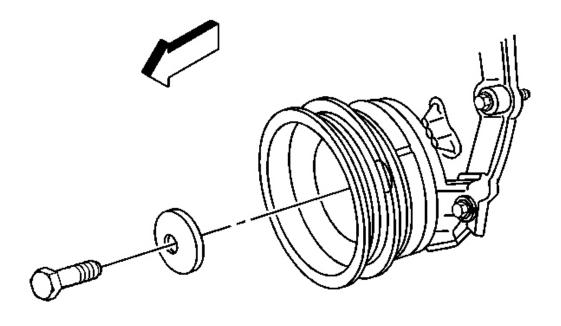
View Of Crankshaft Balancer Washer & Bolt Courtesy of GENERAL MOTORS CORP.
